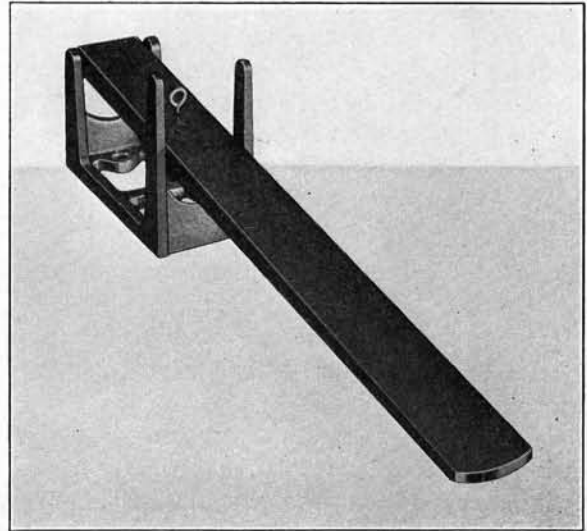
a. Treadle for operating Countershaft Belt Shifters.
